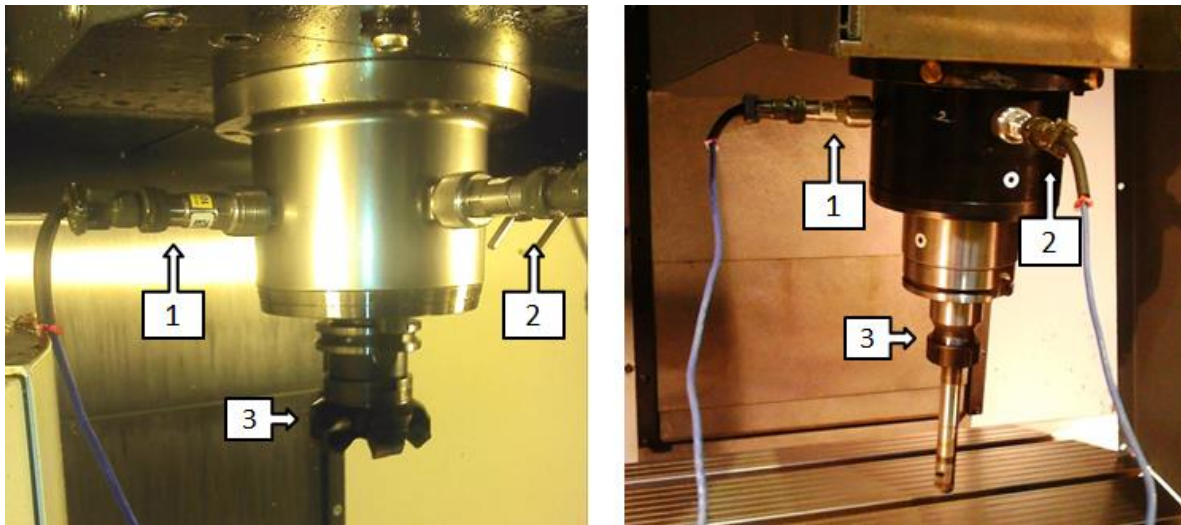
Vibration measurement for Setup1 in C and B. (1) ICP 603C01 accelerometer in X axis (2) ICP 603C01 accelerometer in Y axis. (3) Milling tool
